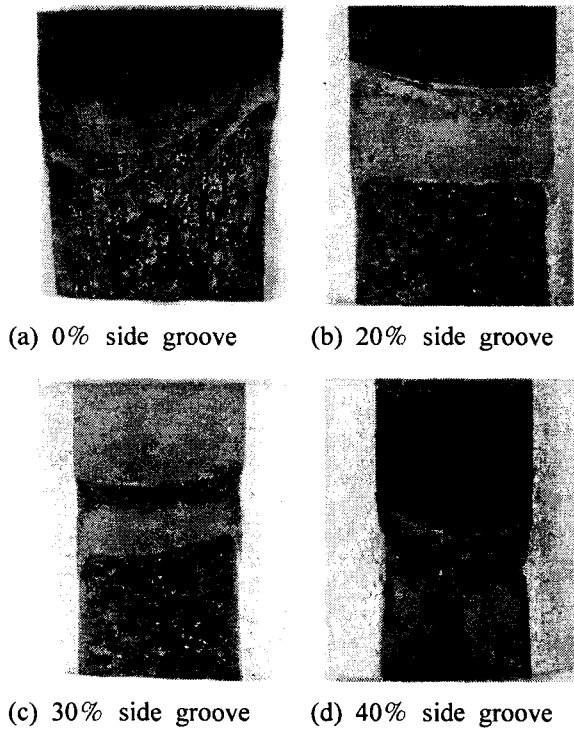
Photomicrograph of fracture surface and various side groove depth
